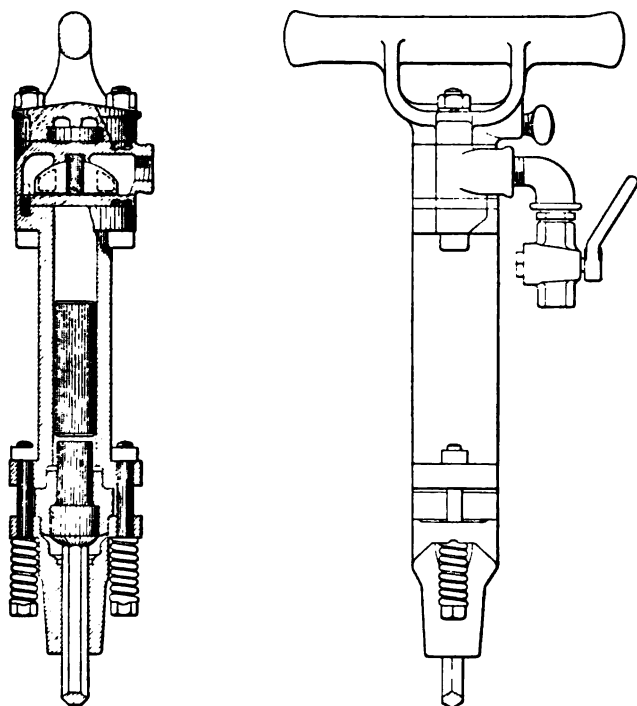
PLUGGER FOR DRILLING HOLES.
